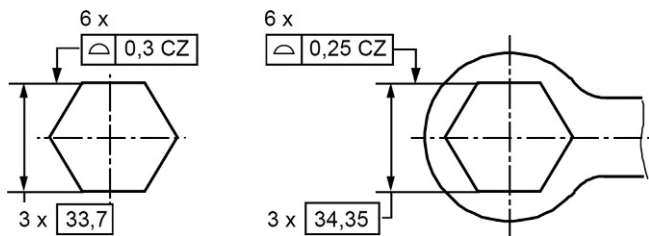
Hexagonal fit with minimum clearance 0.1: surface profile tolerances for the single plane surfaces
